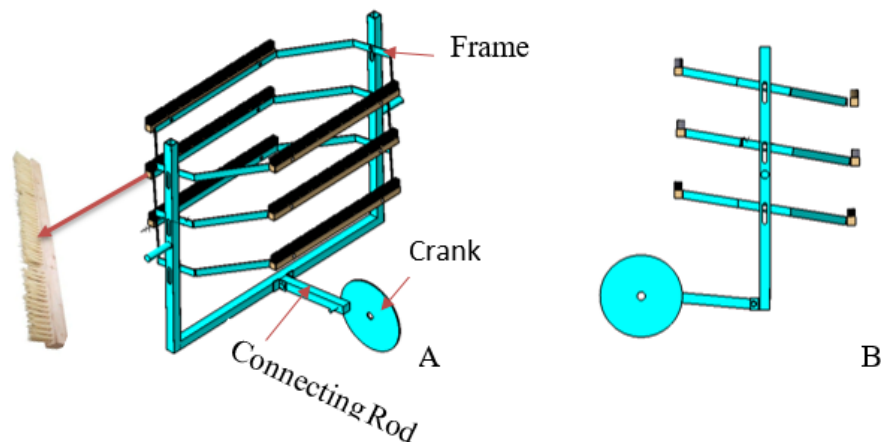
Brush slide mechanism A) isometric view and B) side view
